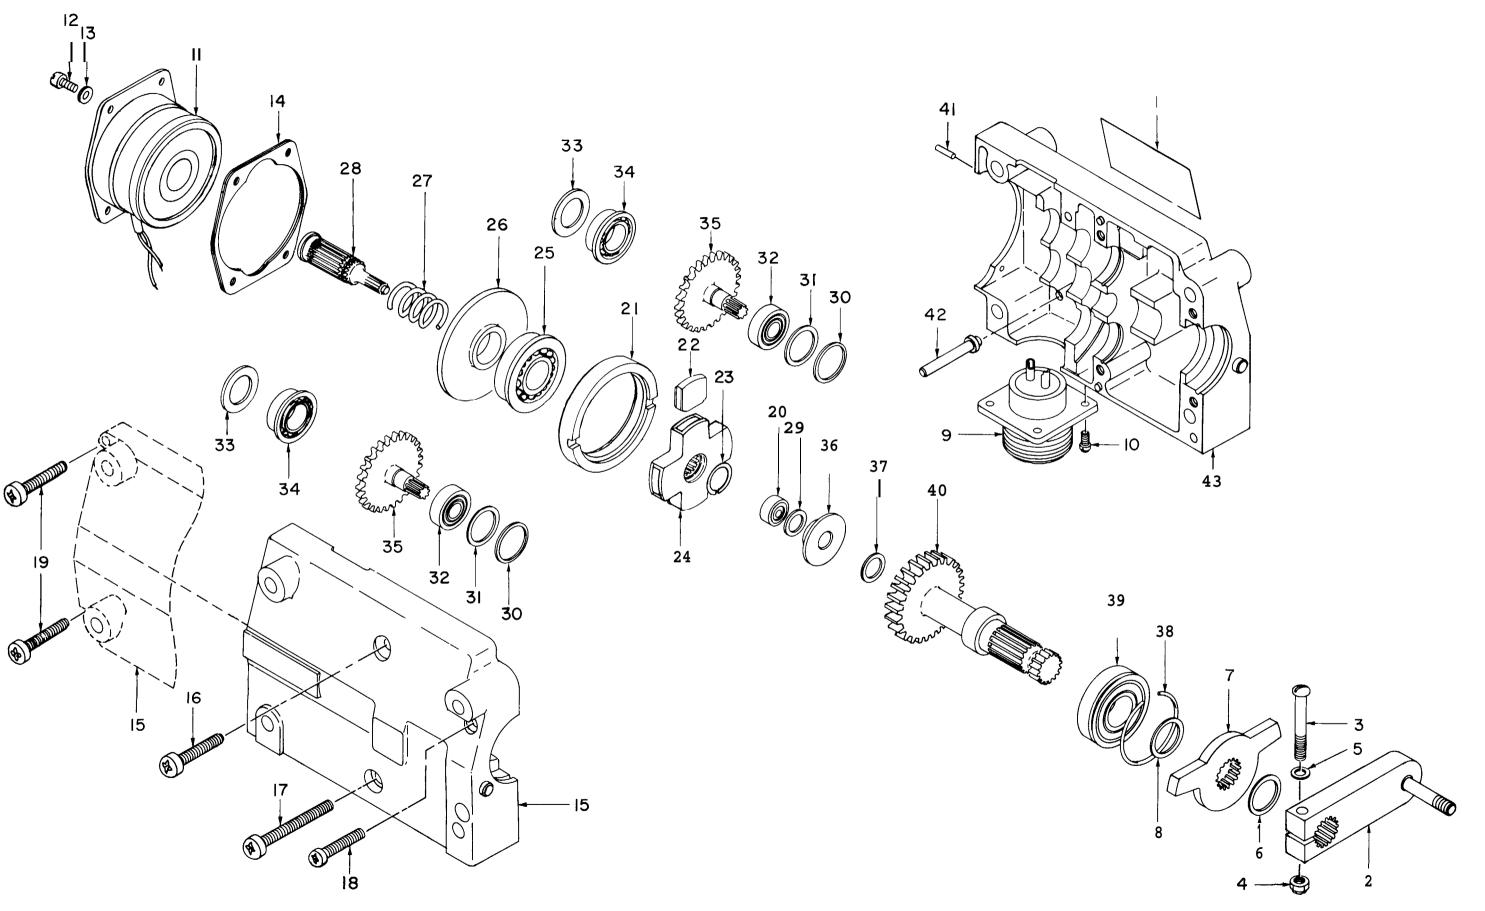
Magnetic Brake, Exploded View, Part No. R460M15-11.
